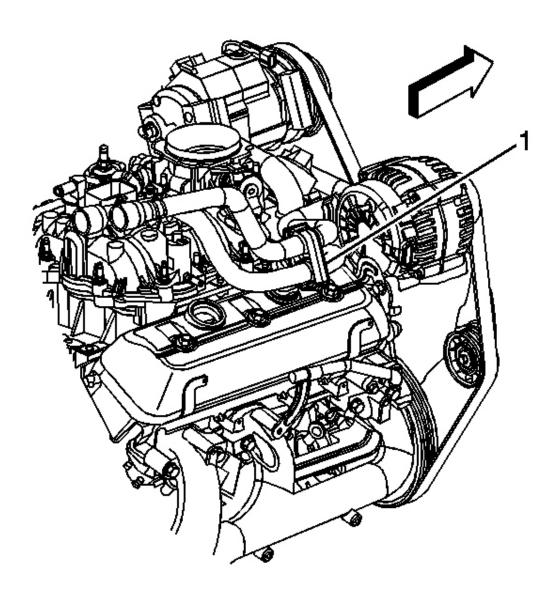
Heater Hose Clamp Courtesy of GENERAL MOTORS CORP.
